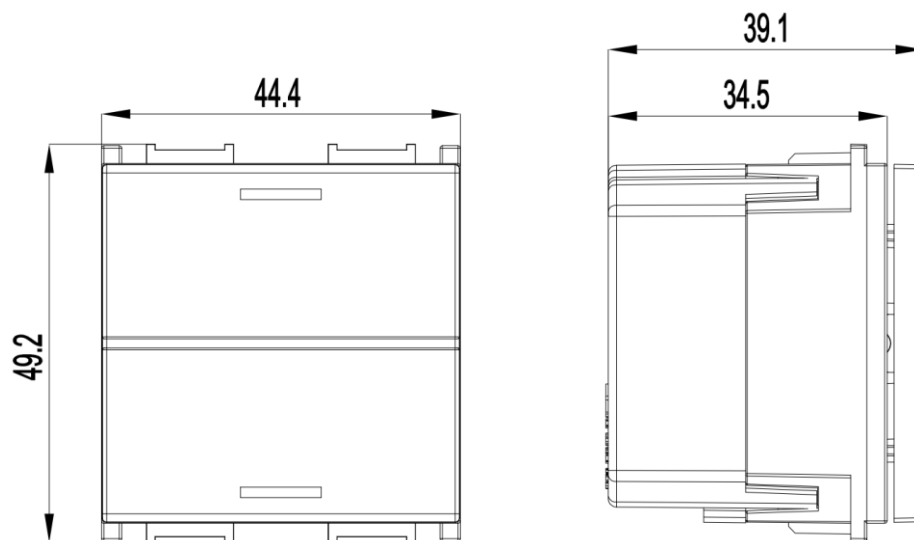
Top and side view of the 1 Gang 2M KNX Switch
